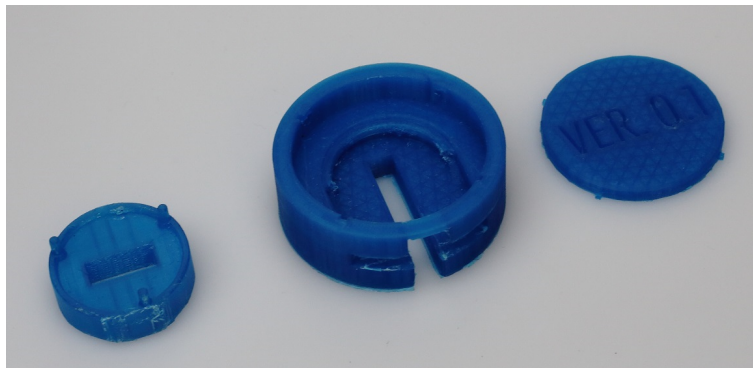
First prototypes for circuit board and faceplate installation. On the left: A circuit board bed with installation guides and an opening for the connector. In the middle: A concept for a side installation with an internal groove for the circuit board. On the right: A faceplate with small radial installation guides.
